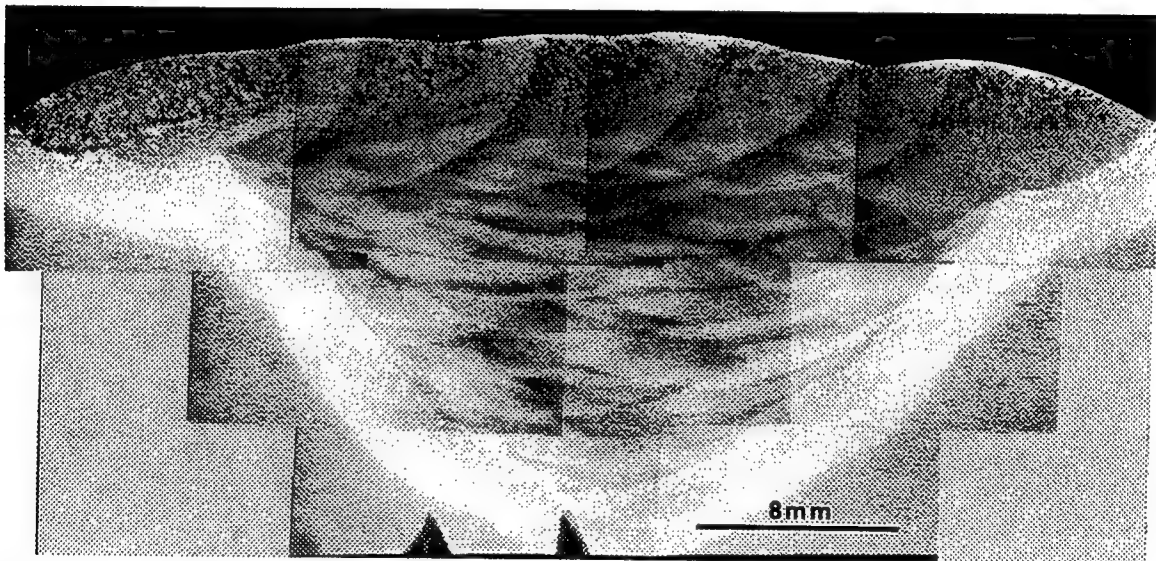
CS2AT Multi-run TIG weld
